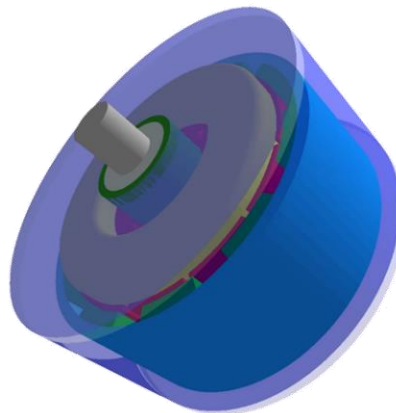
12/10 outer rotor configuration 3D view with transparent housing
